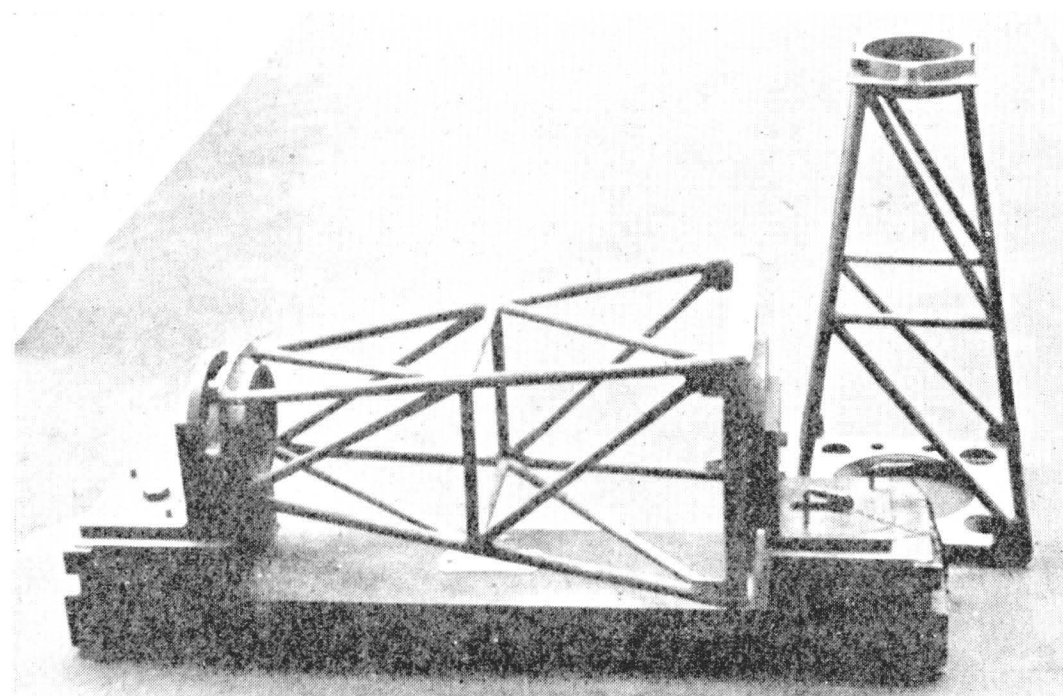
Final checking jig for the airscrew extension shaft supporting structure
